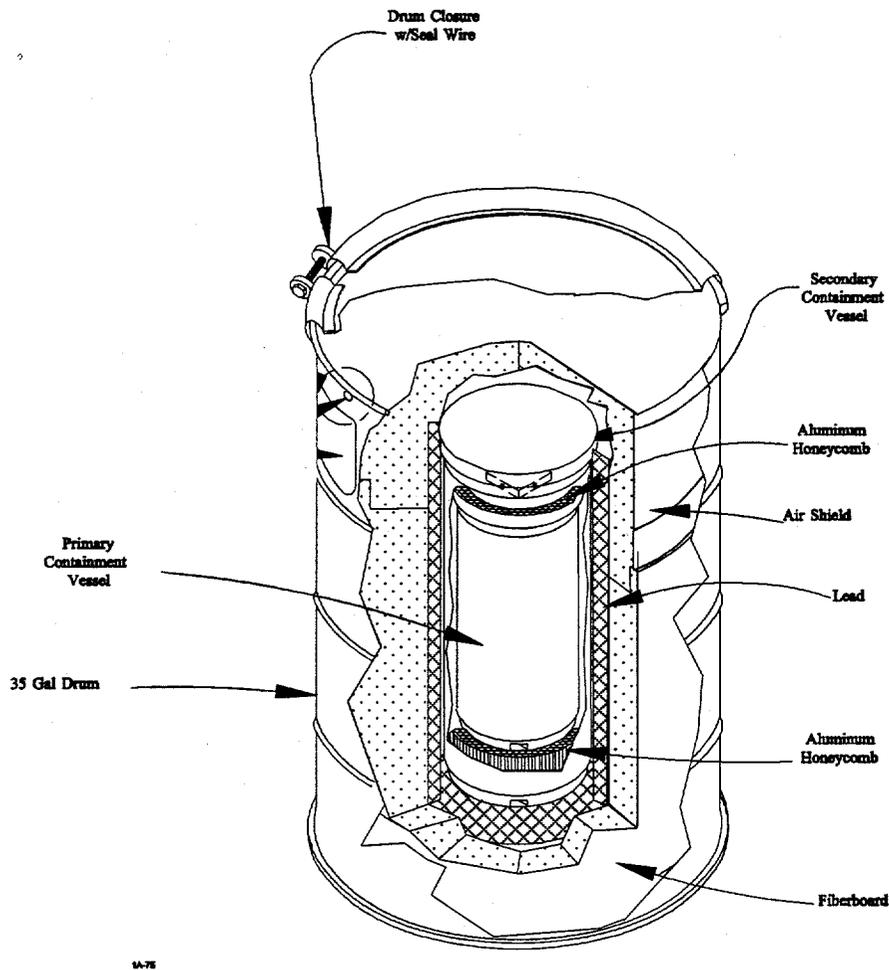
Overall Schematic of the Model 9975 Packaging Assembly.¹
